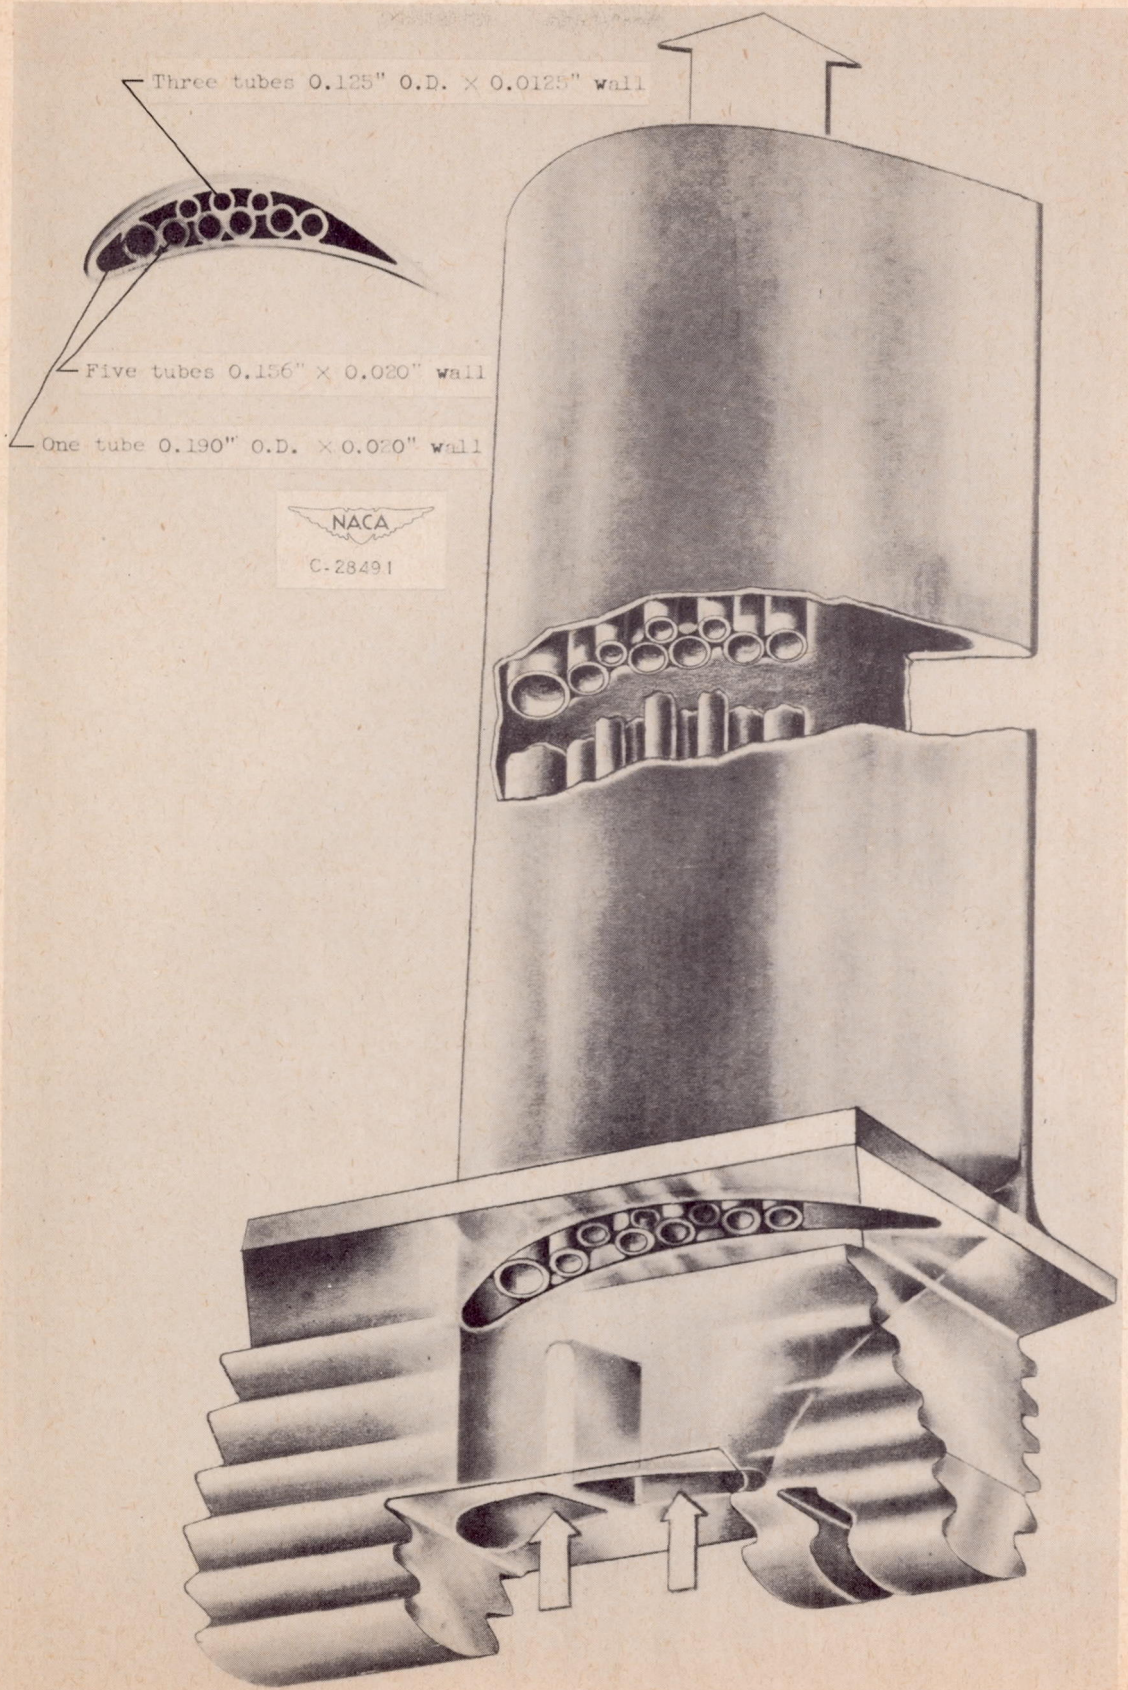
Nine-tube pack cast X-40 air-cooled blade.
